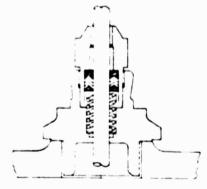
psi Packing for 1/2 to 1-1/4 in. Screwed Valve Bodies.
